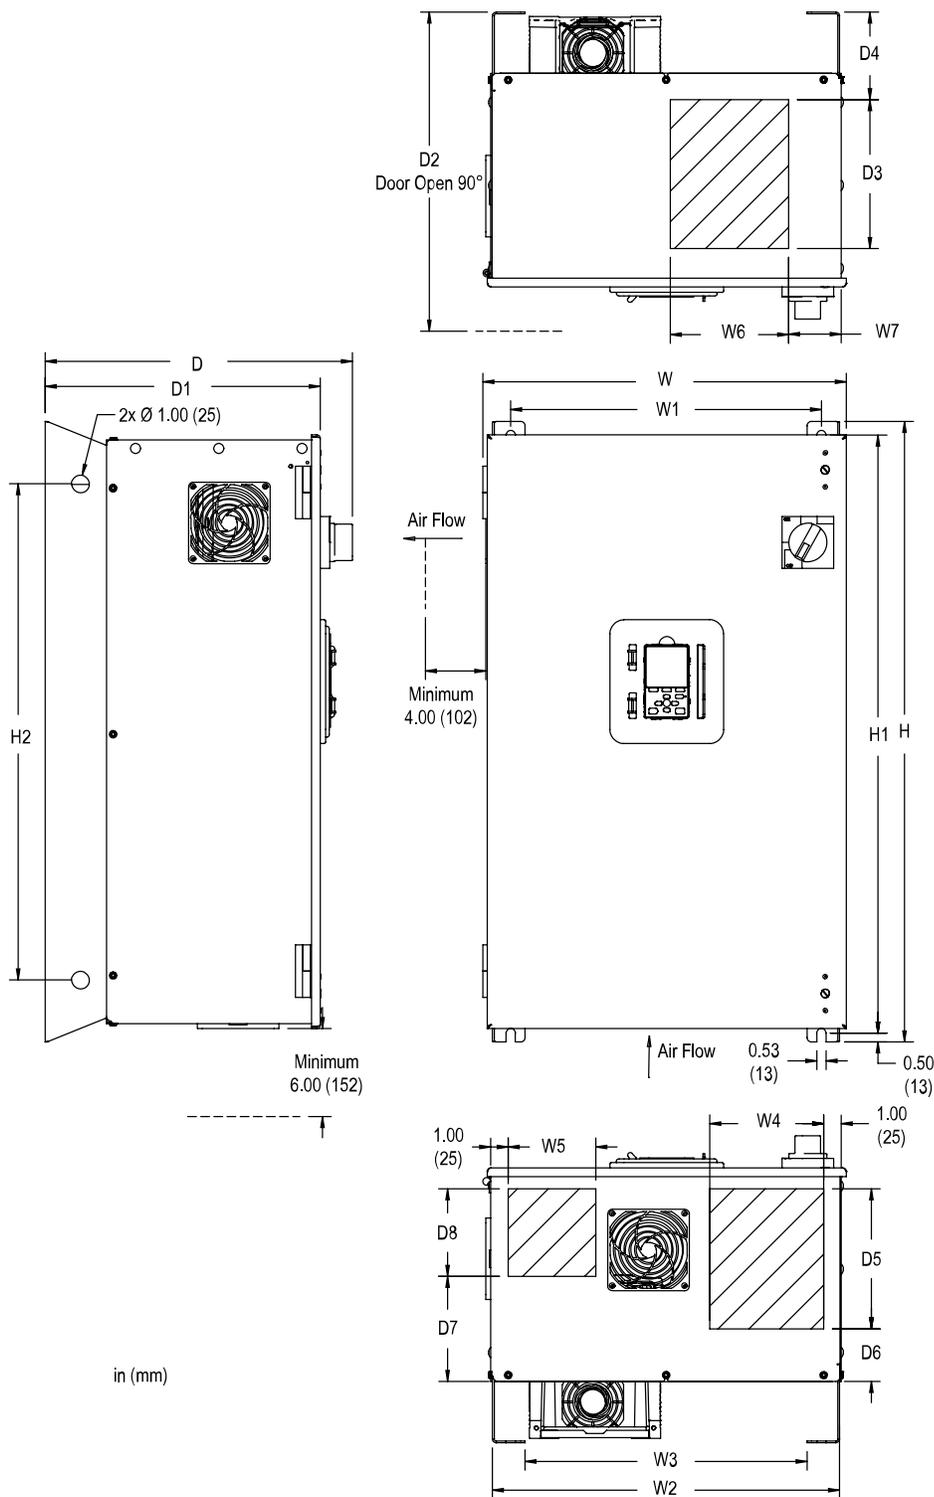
Enclosed Exterior and Mounting Dimensions Diagram
